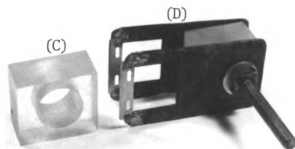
Trimmer, (C) is holding jug (D) is two-bladed knife.
